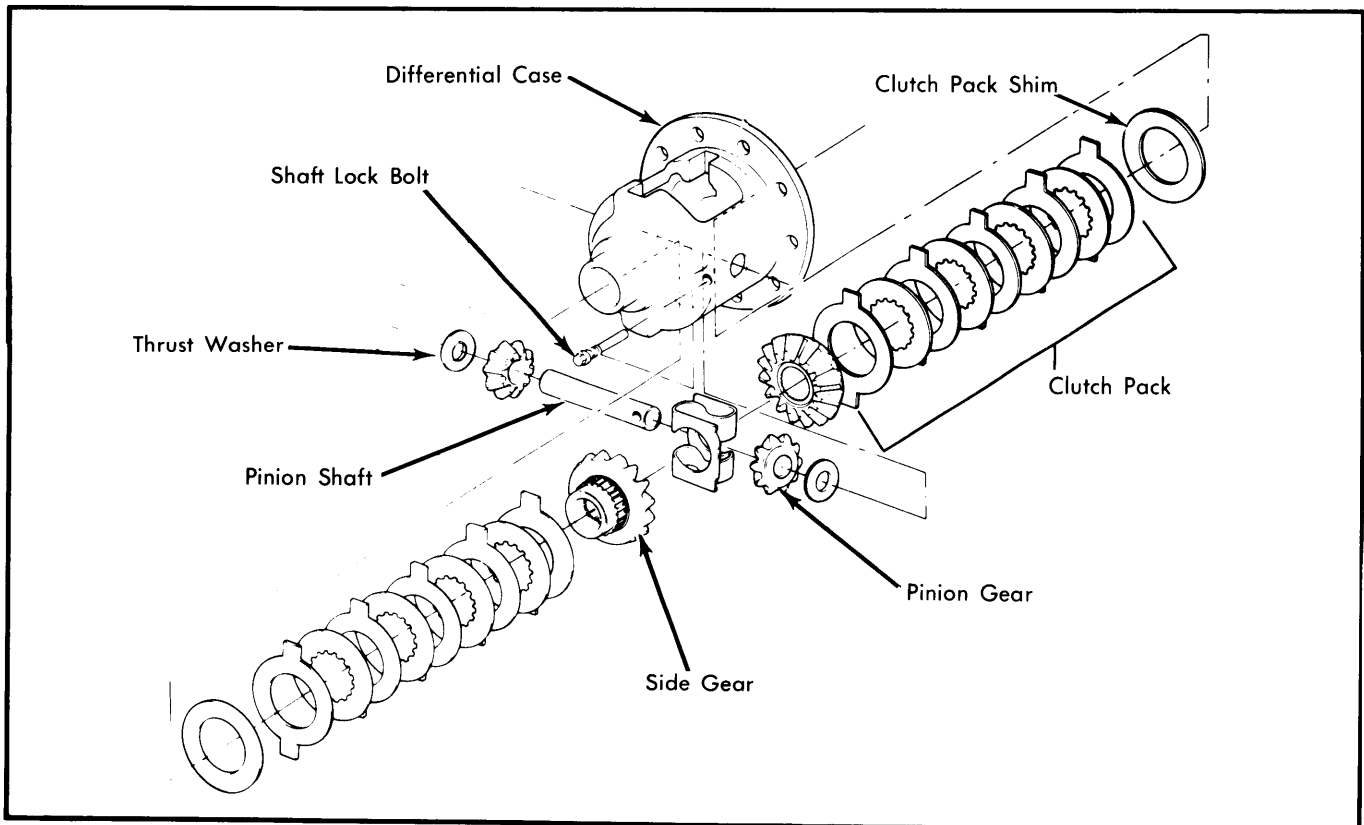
Exploded View of Ford Motor Co. Traction-Lok Differential
